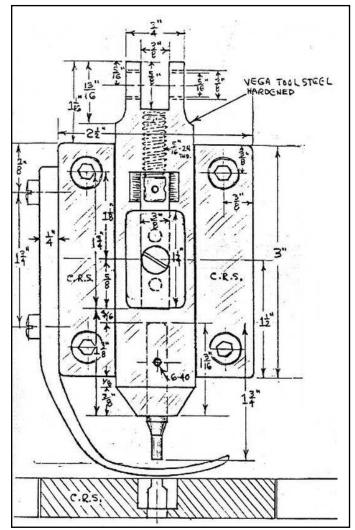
A frontal view of the punching machine head as drawn by Ken Smith. Courtesy: Ken Smith Archives.
